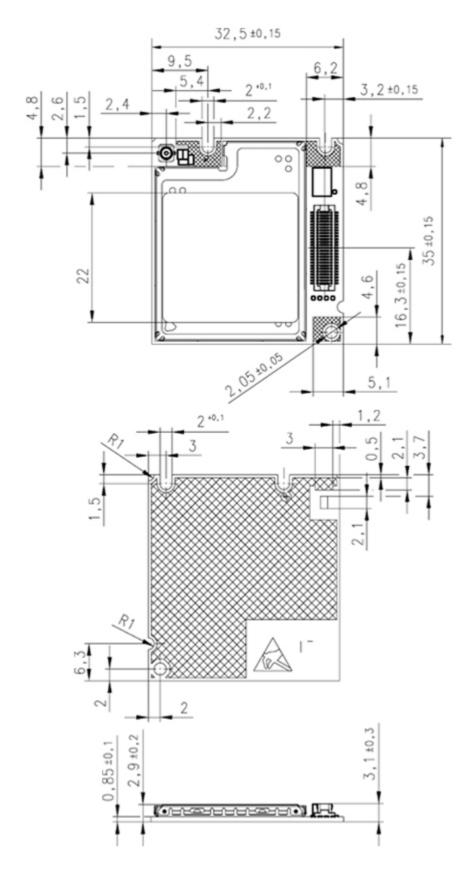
Mechanical dimensions of MC55i (all dimensions in millimeters)
